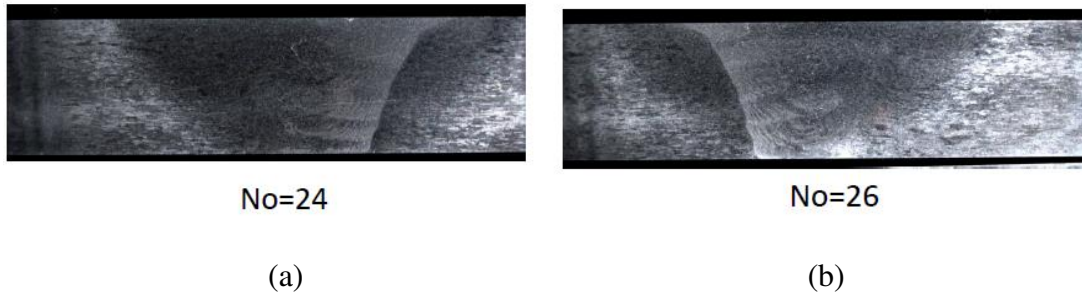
16: Stereo Microscope Images of Aged Metallography Samples from (a) No. 24 and (b) No. 26 Weld Plates.
